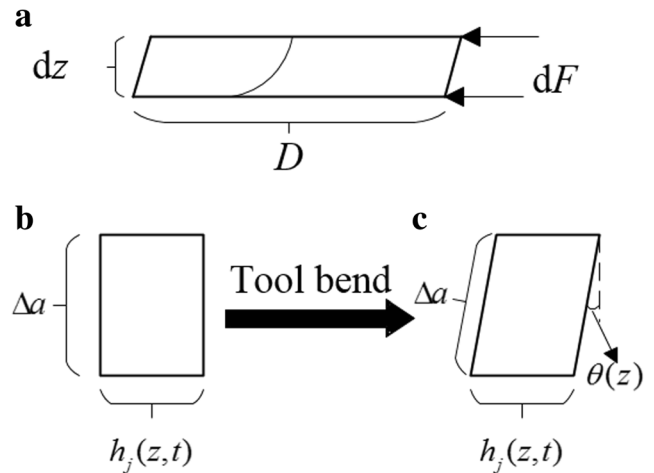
(a) Infinitesimal section of milling tool (b) Infinitesimal chip without tool bending (c) Infinitesimal chip with tool bending
